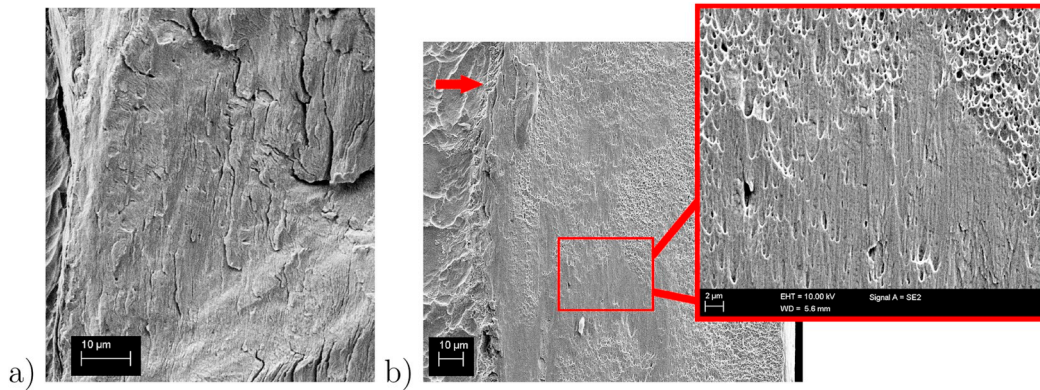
Detailed SEM images of the weld fracture surfaces along the shear part: a) a GE2 specimen's weld fracture surface at central point ($S \approx 10\text{--}12\text{ mm}$) on the left specimen side; b) a GE2 specimen's weld fracture surface at central point ($S \approx 10\text{--}12\text{ mm}$) on the right specimen side. Images related to a specimen tested with a nominal shear (peak) stress of 32 MPa, after failure (3034 cycles). The red arrow is showing regions of fatigue damage at the weld root.
